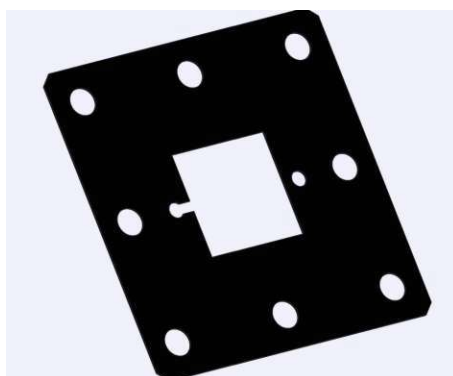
CAD Drawing of the gasket ensuring sealing between endplate and flowfield
